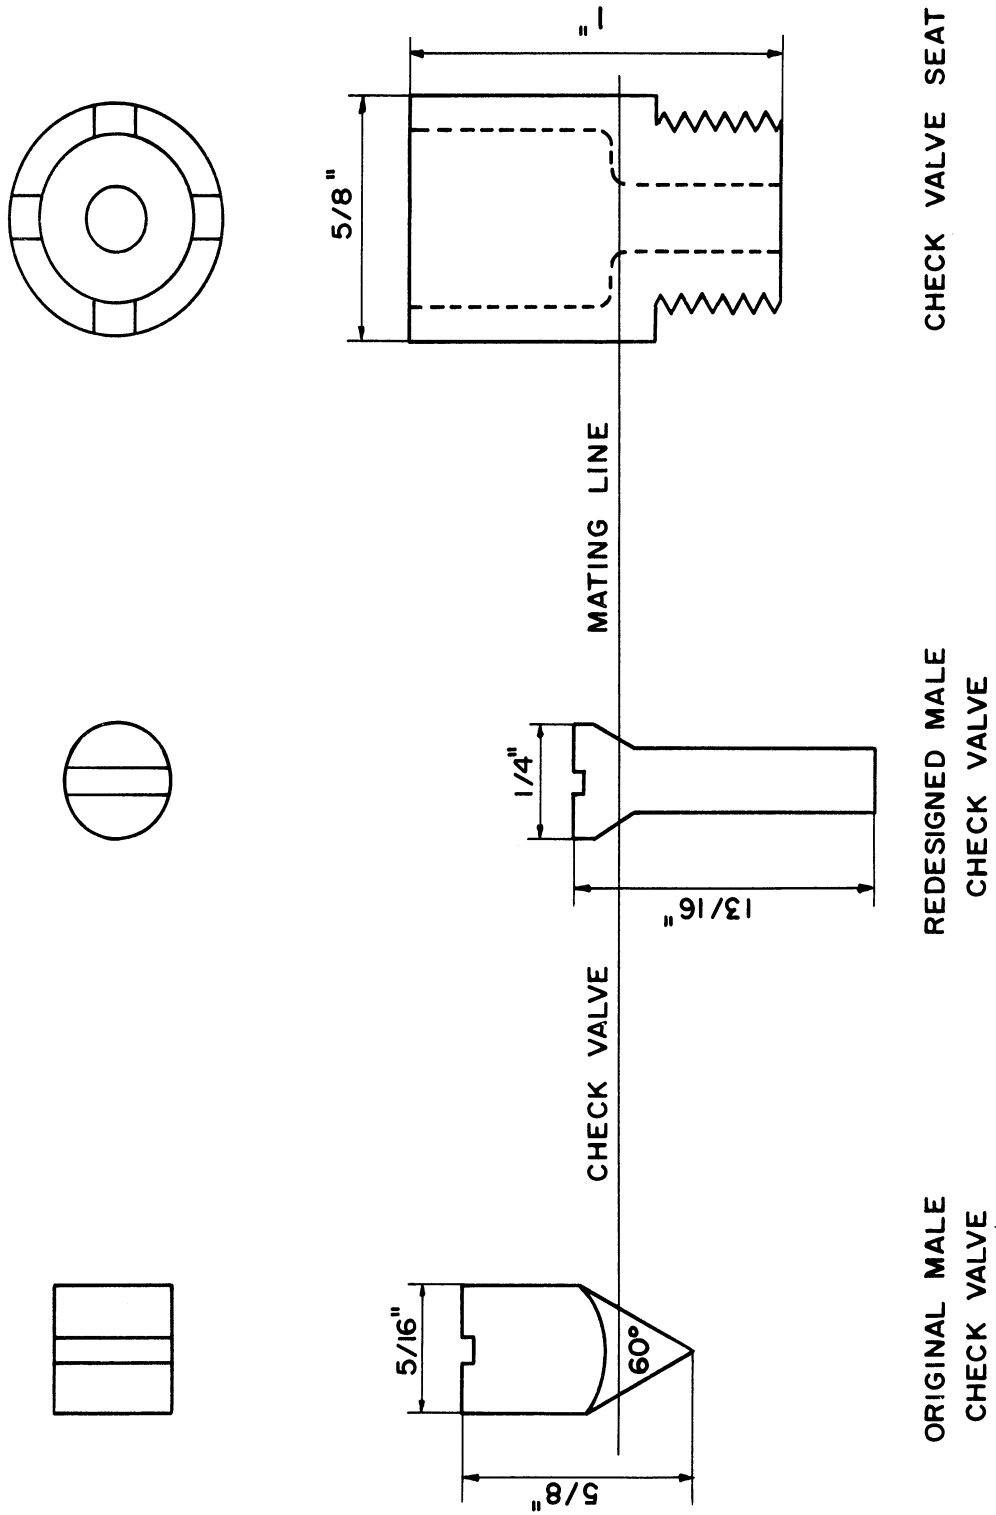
Check Valve Assembly for Hills-McCanna Pump
